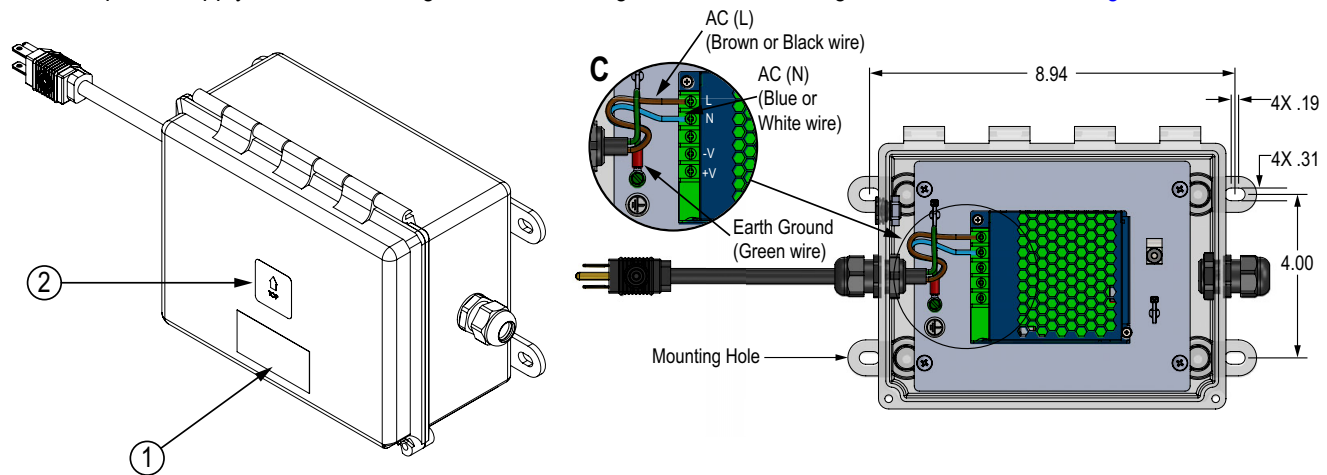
24 VDC Remote Power Supply Replacement Parts
